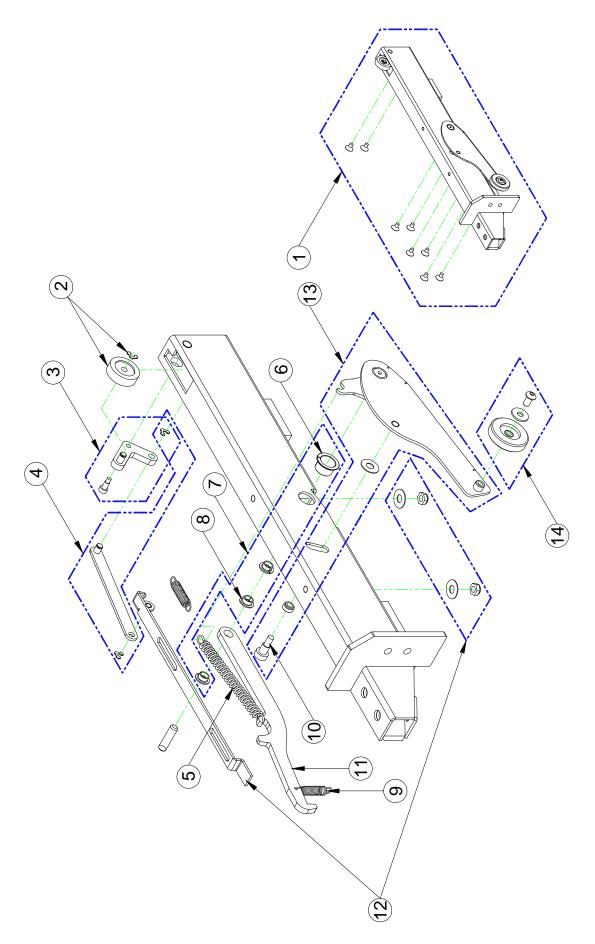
ROLLSTOP LATCH ACTUATOR ASSEMBLY
